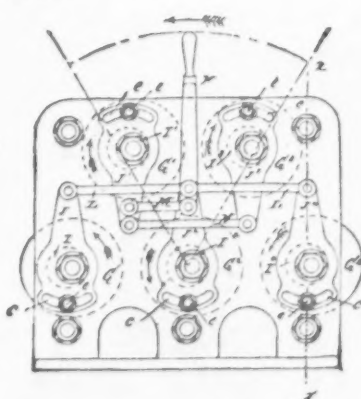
Side Elevation of Hot-Rail Straightening Machine.
